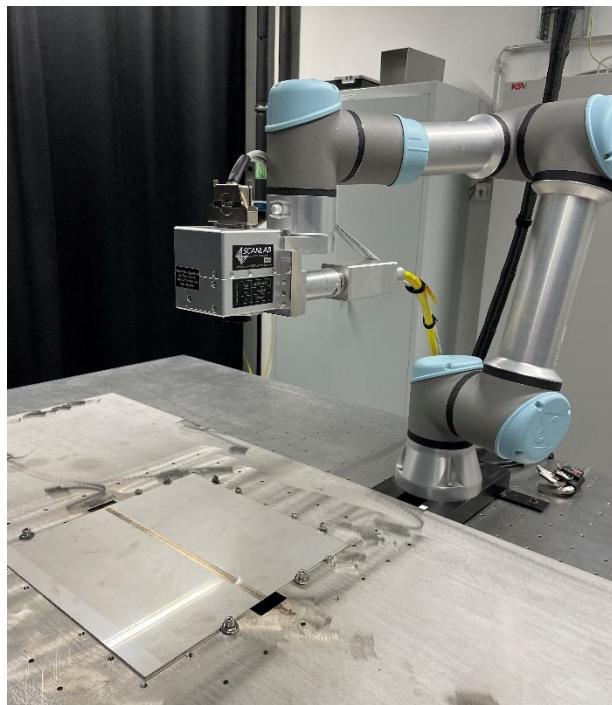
Prototype laboratory setup for cobot-based and automated laser cleaning. Cobot (UR5e) and galvo scanner (Scanlab ScanCube 7) during laser cleaning as weld seam preparation.
